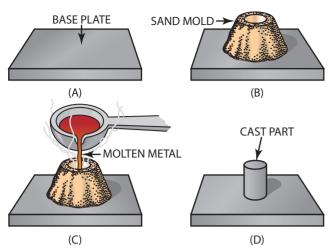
Direct casting: (A) base plate to have part cast on it, (B) sand molded into shape desired, (C) pouring hot metal into mold, and (D) part cast is now part of the base plate.
